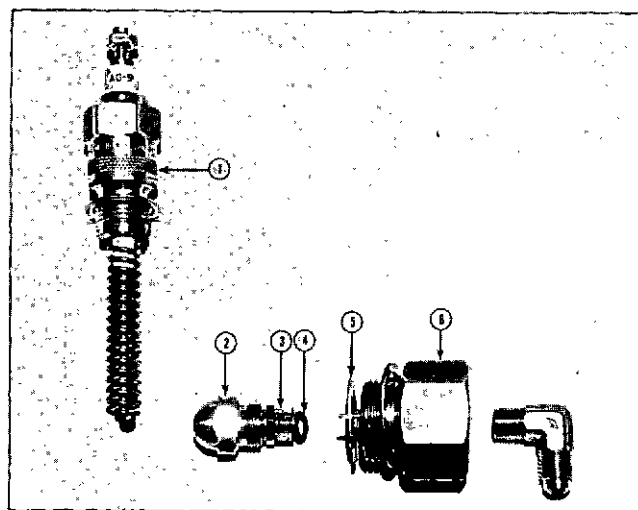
, N21019. Glow plug/preheater adapter/spray nozzle
